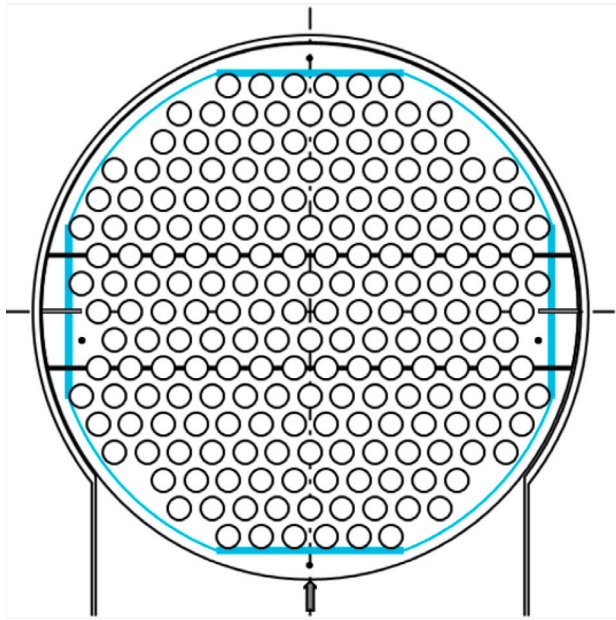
Cross section of the sized shell-tube heat exchanger.
